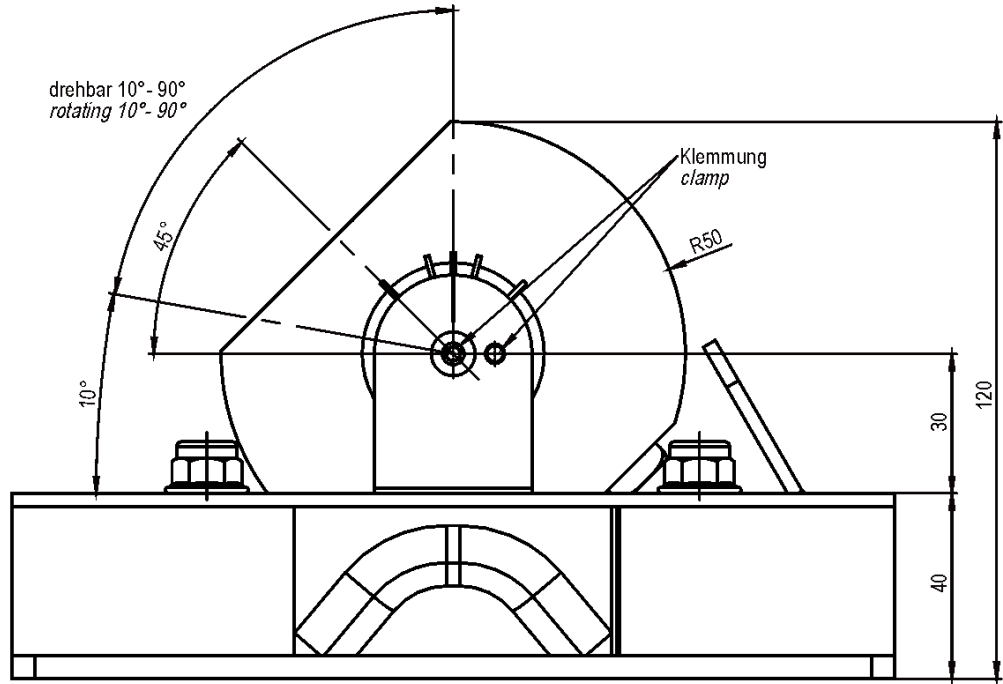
Dimensioned drawing ball sensor Type NOS0H0V200
